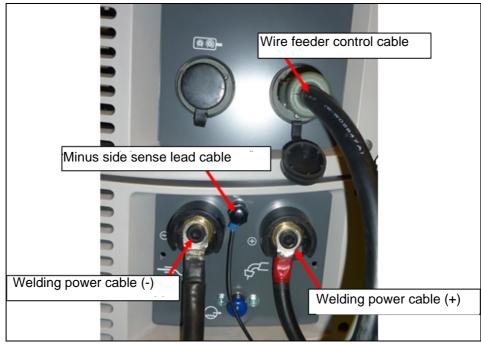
(a) Replacing the welding power supply (1/3)
